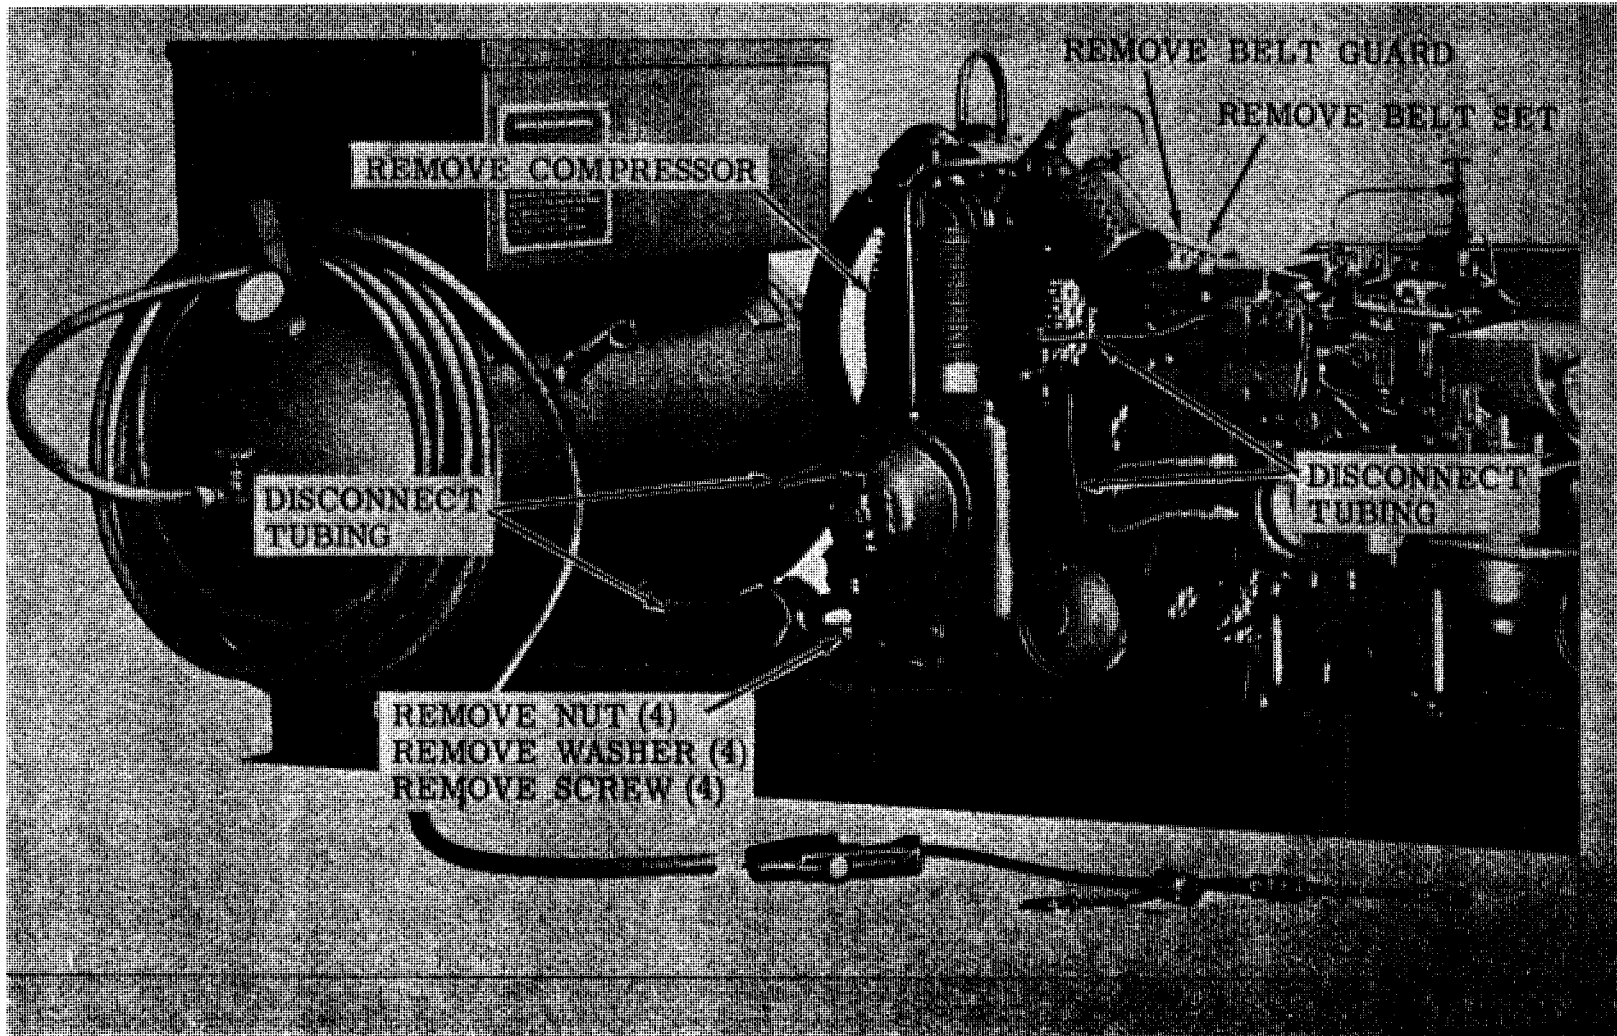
Compressor, removal and installation, model BGR-5M-1.
